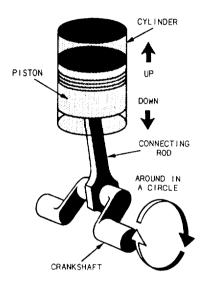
Cylinder, piston, connecting rod, and crankshaft for one cylinder of an engine.
